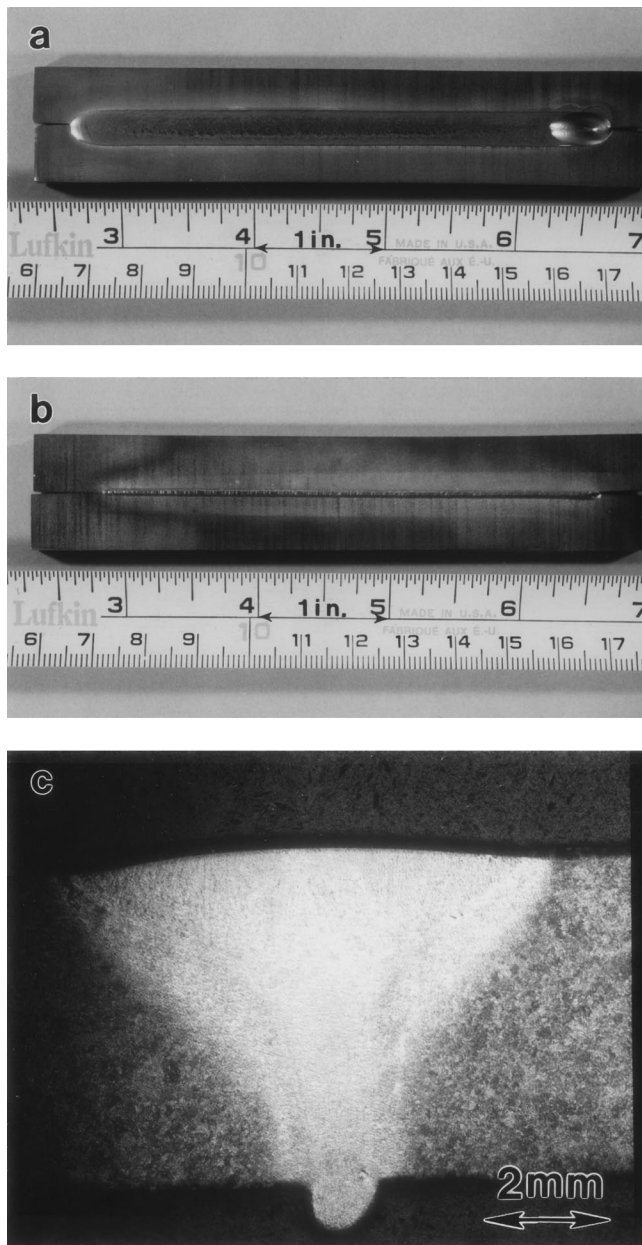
Optical photographs showing the (a) top surface, (b) bottom surface, and (c) cross section of a crack-free butt weld made at a cooling rate of 240 °C/s.
